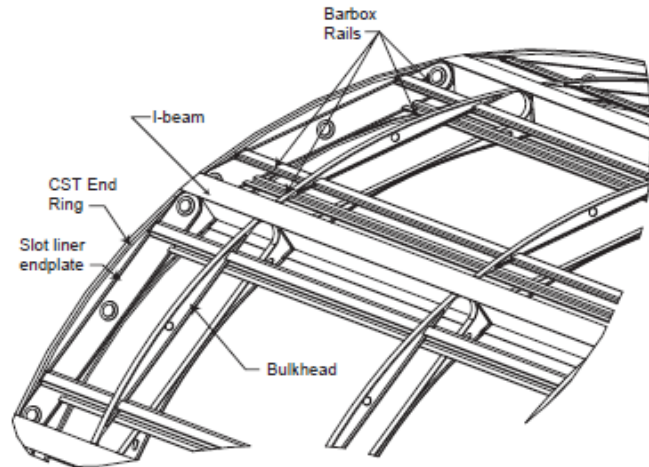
Details of the Central Support Tube assembly near the end opposite the Transition Flange. The inner and outer skins have been removed, as well as the four pieces of stainless steel sheet metal that form the slot liners when bolted to the rails. The rails and slot liners extend all the way through the Transition Flange.
